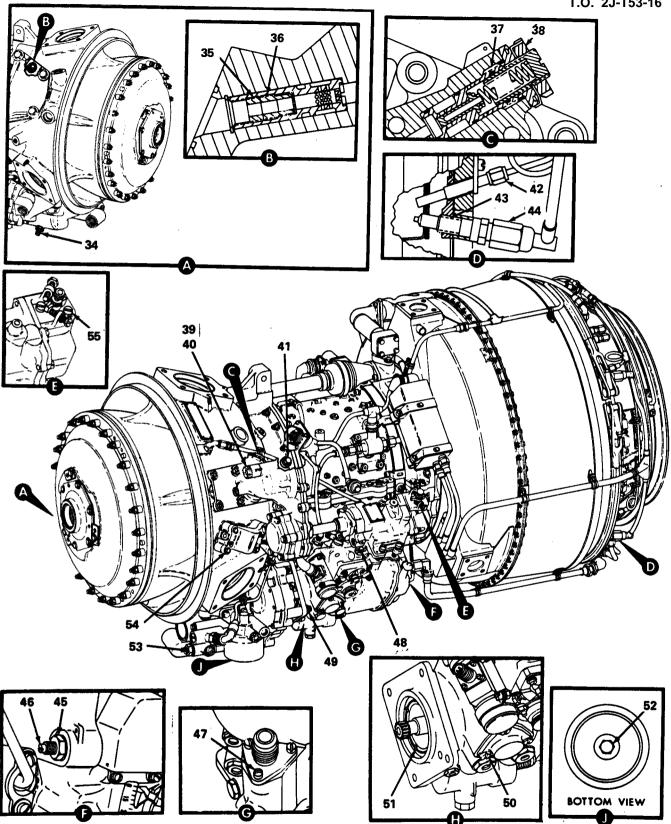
Special Torque Value Locations (T53-L-13B/703 Engines) (Sheet 4 of 6)
